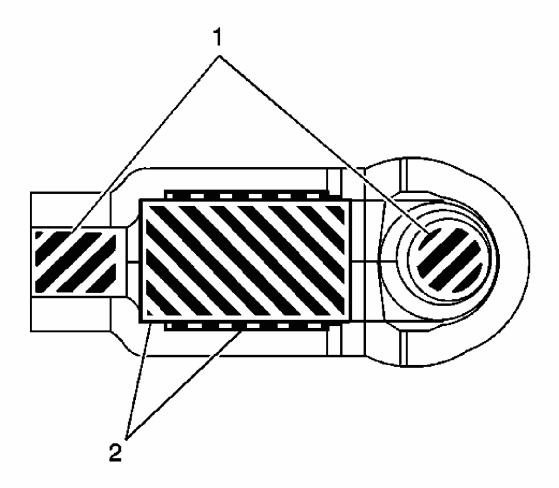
Identifying Roller Pivot Pocket (2) & Valve Slot Areas (1) Of Camshaft Followers
